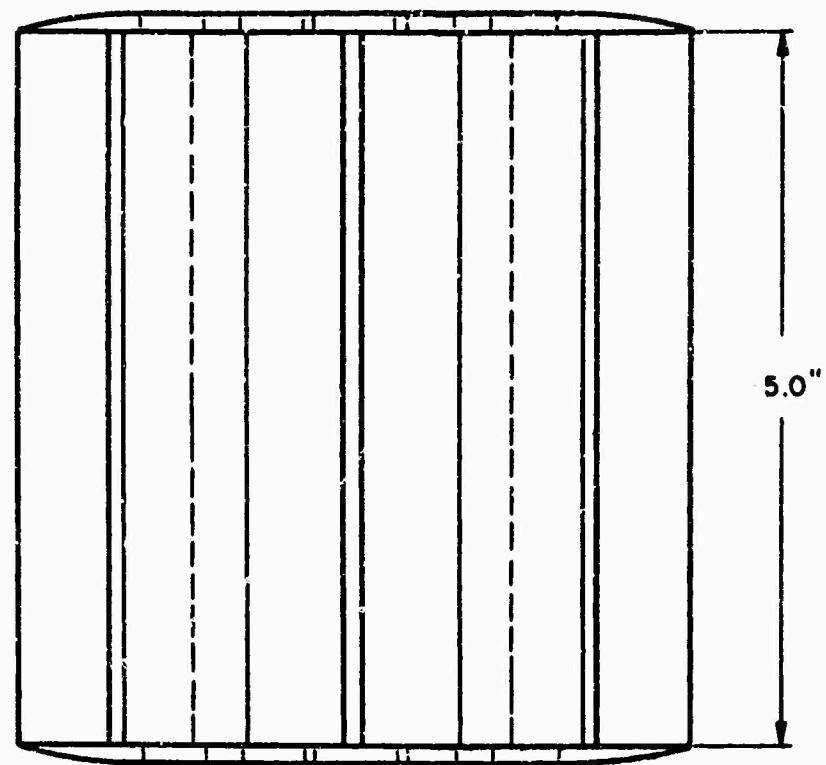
MODEL PADDLE WHEEL WITH FIXED RADIAL BLADES AND END PLATES
